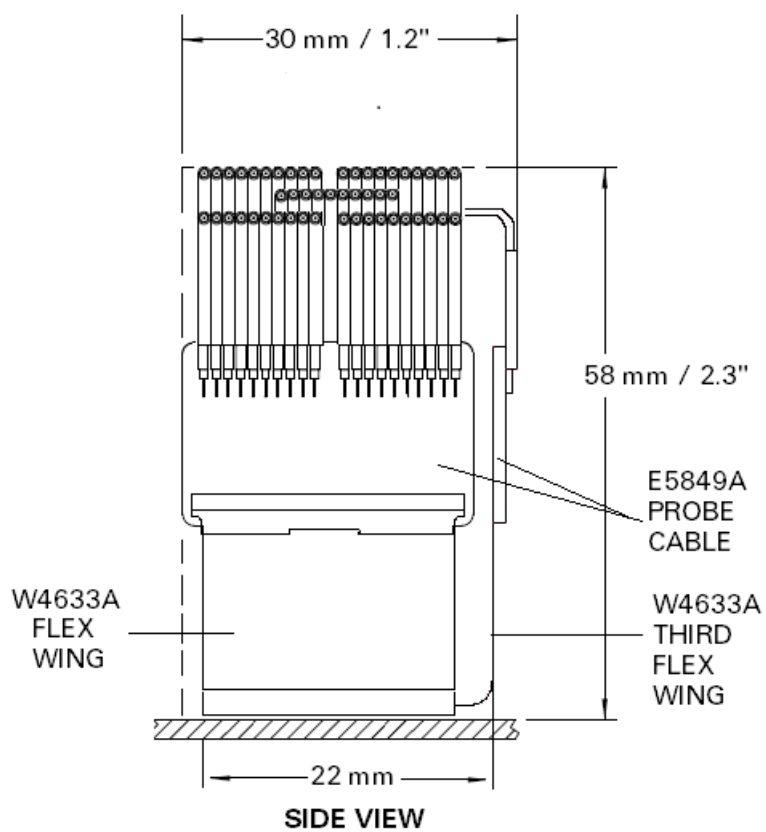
KOV of a W4633A interposer with an E5849A cable (SIDE VIEW)
